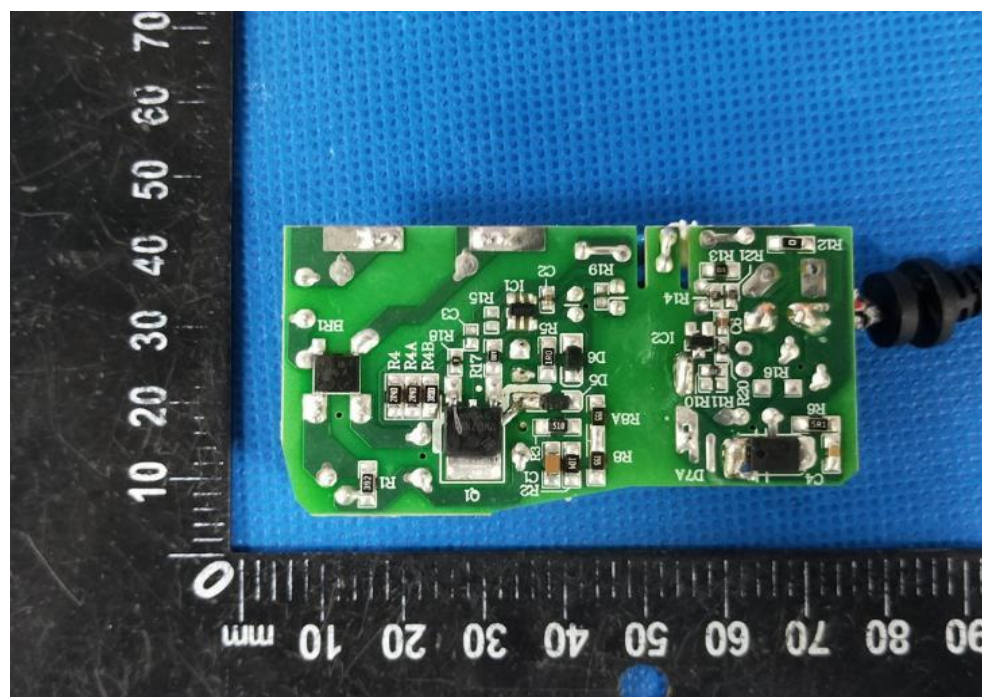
PCB Bottom side view for model IVPxxxx-yyyy (with D7A)
